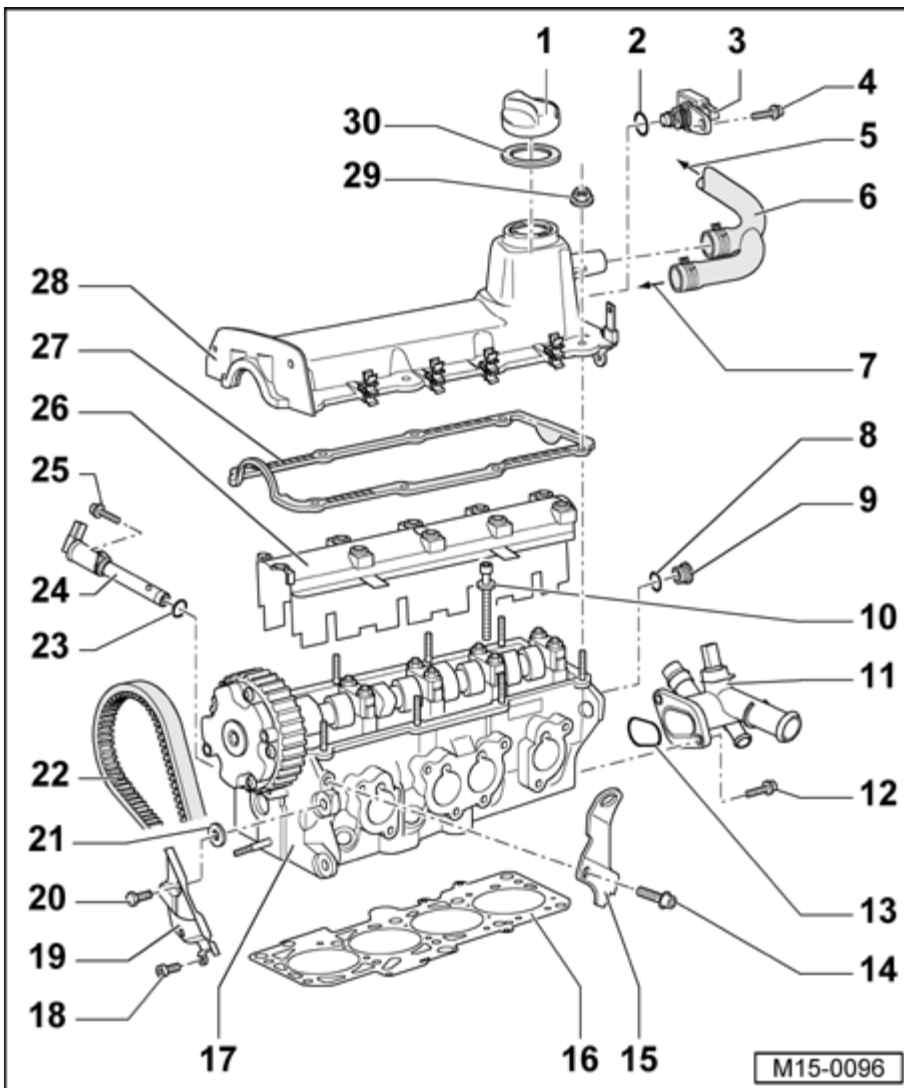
Exploded View Of Cylinder Head Components - Engine Code BBW
